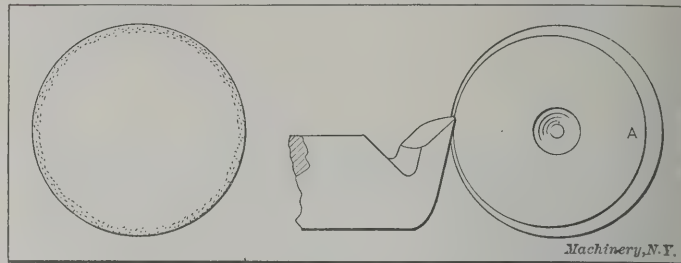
Tool Steel should be centered Concentric, in order to remove the Decarbonized Outer Surface
